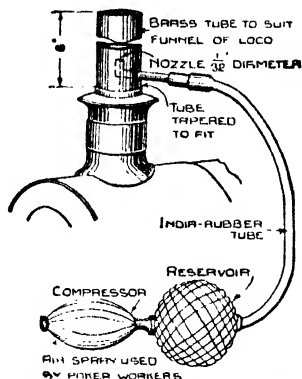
Auxiliary Hand-blower for Steam Raising.
